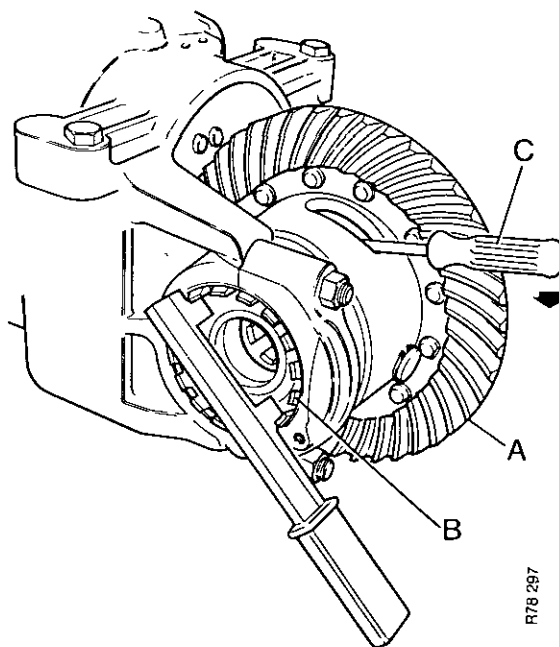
ADJUSTING DIFFERENTIAL BEARINGS
